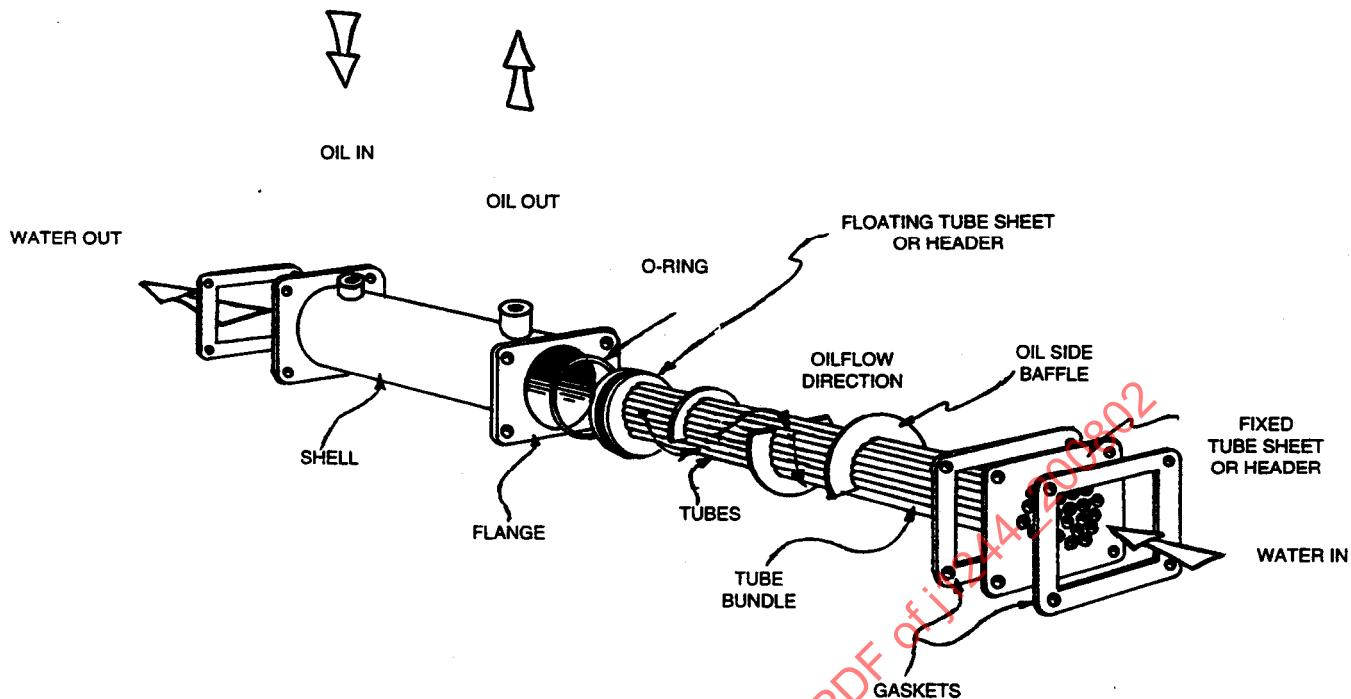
SHELL AND TUBE REMOVABLE BUNDLE OIL TO WATER COOLER
